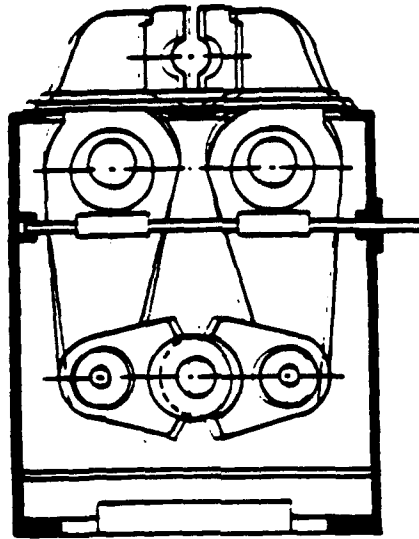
Two Die Radial Forging Machine (Ref. 8).
